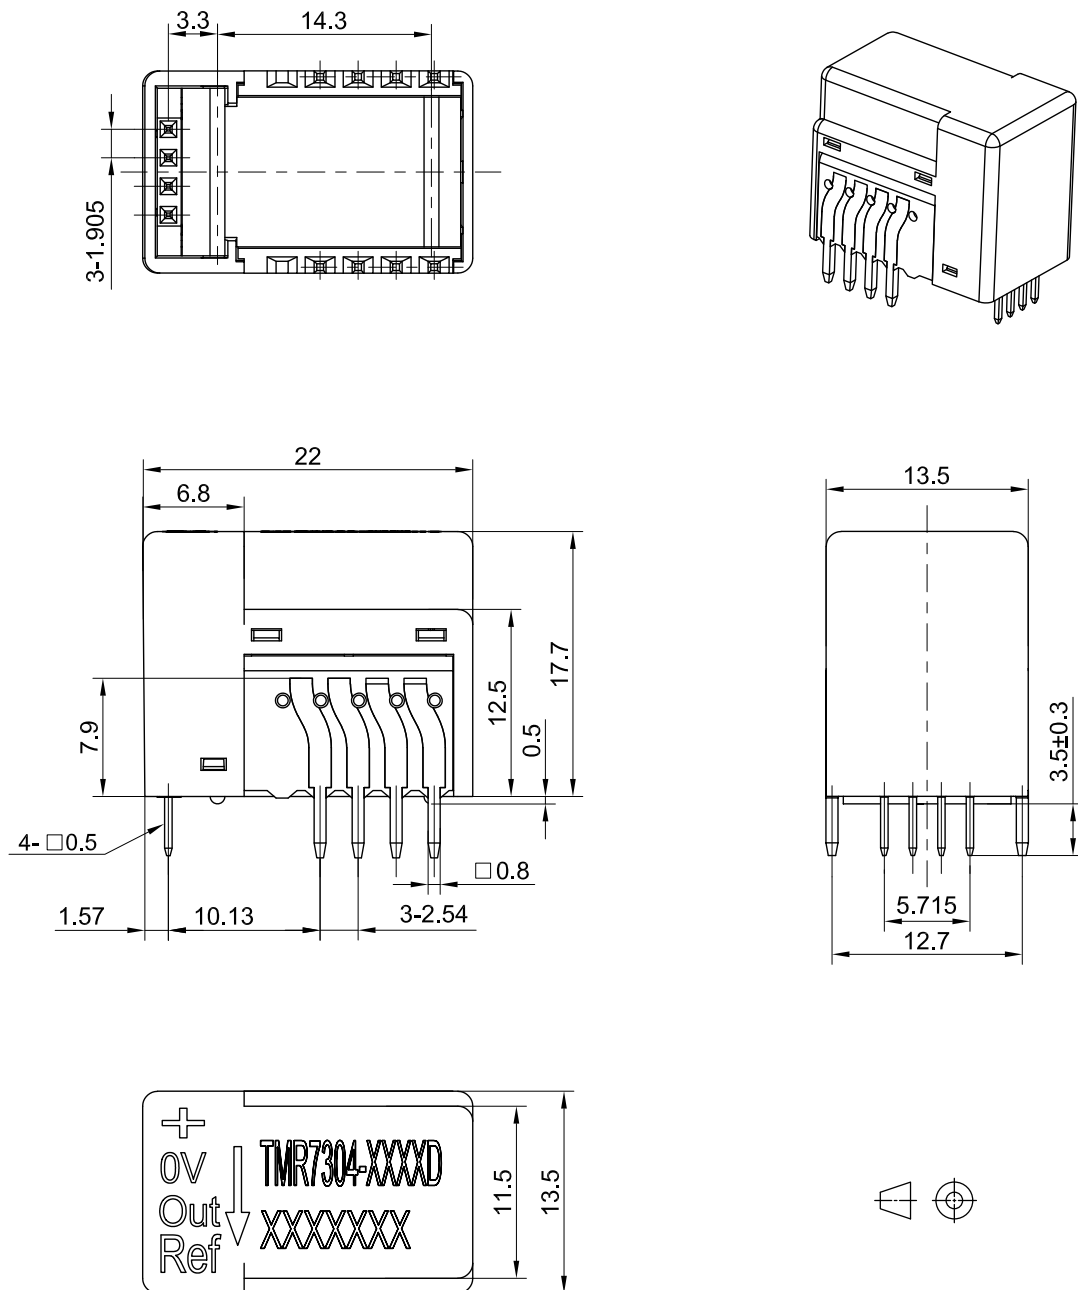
Dimension for TMR7304-D (unit: mm, tolerances for unmarked scales ±1 mm)
